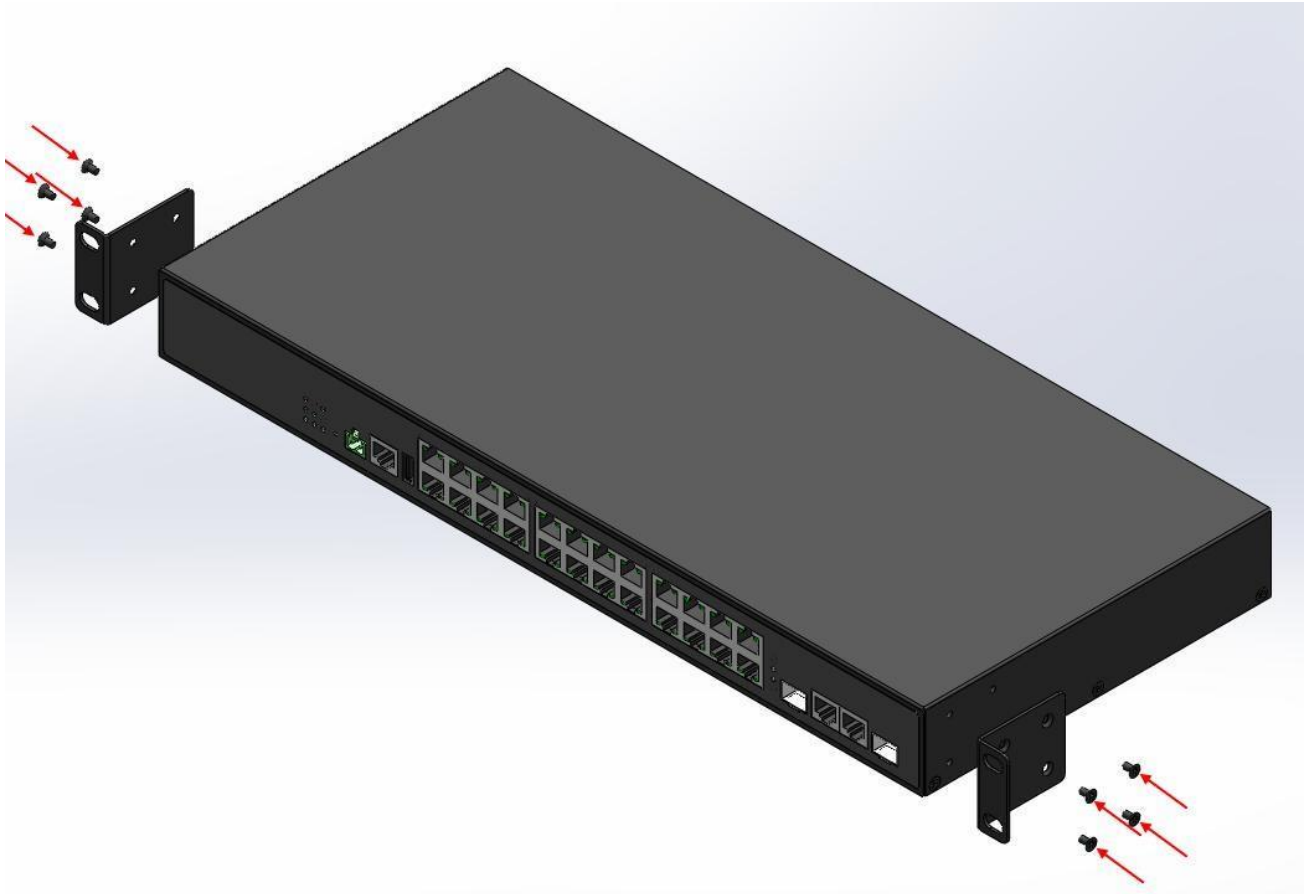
The Top View of the Switch and Rack Mounting Bracket
